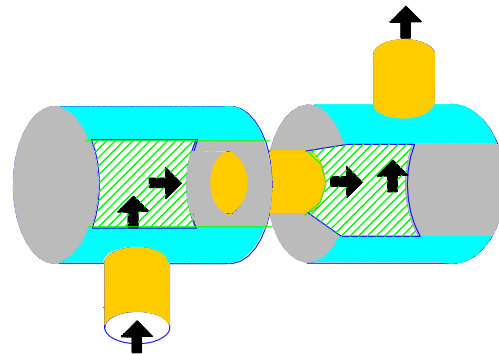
3-D cross-section for a double-chamber muffler hybridized with side inlet/outlet tube.
